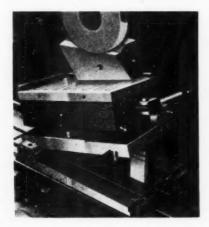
Special chuck made to fit airplane propeller blades. Operation will consist of planing and milling. Note curve of chuck surface made to fit exact size of propeller.
